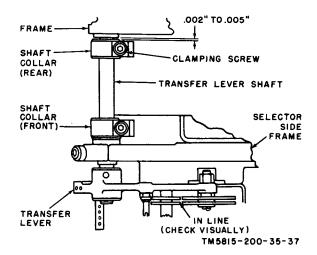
T-levers alinement and transfer lever shaf t end play adjustment.
